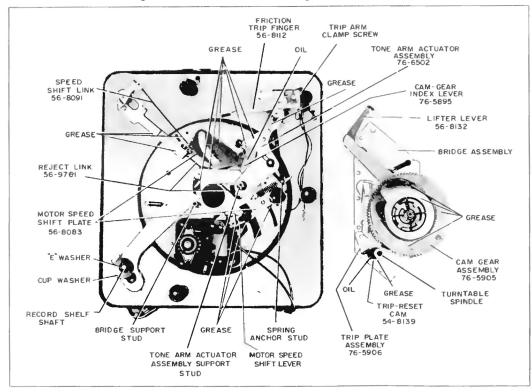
Bottom View, Bridge Removed, Showing Lubrication Points
